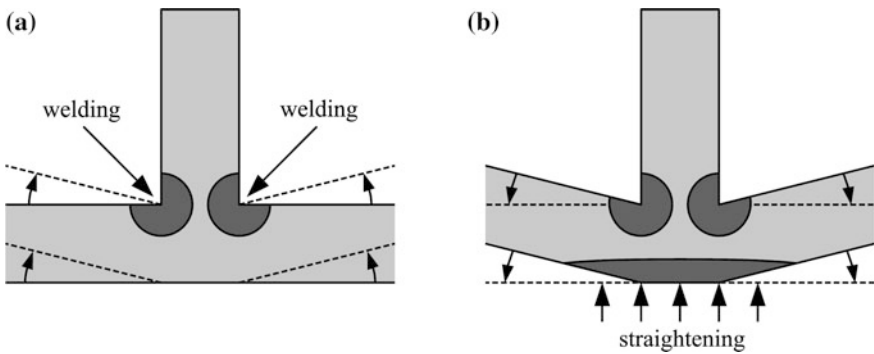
Schematic illustration of the straightening of the weld distortion of a T-joint
